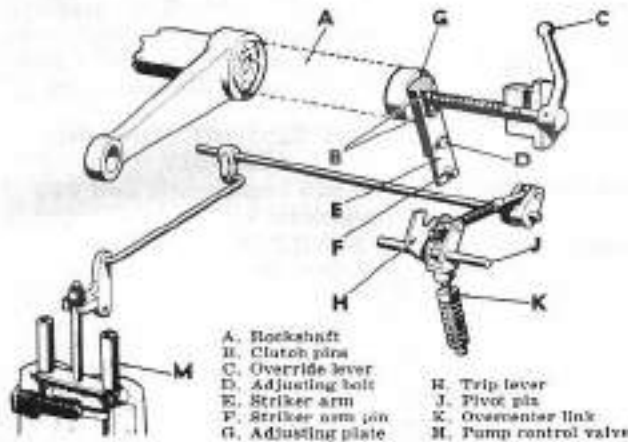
Schematic view of automatic hold mechanism; refer to Fig. 160 for exploded view. As rockshaft (A) reaches fully raised position, pin (F) in striker arm engages notch in trip lever (H) which moves spring loaded link (K) overcenter and through linkage, opens pump control valve (M). Moving override lever (C) out of detent position disengages clutch pins (B) making mechanism inoperative. Refer also to Fig. 163.
